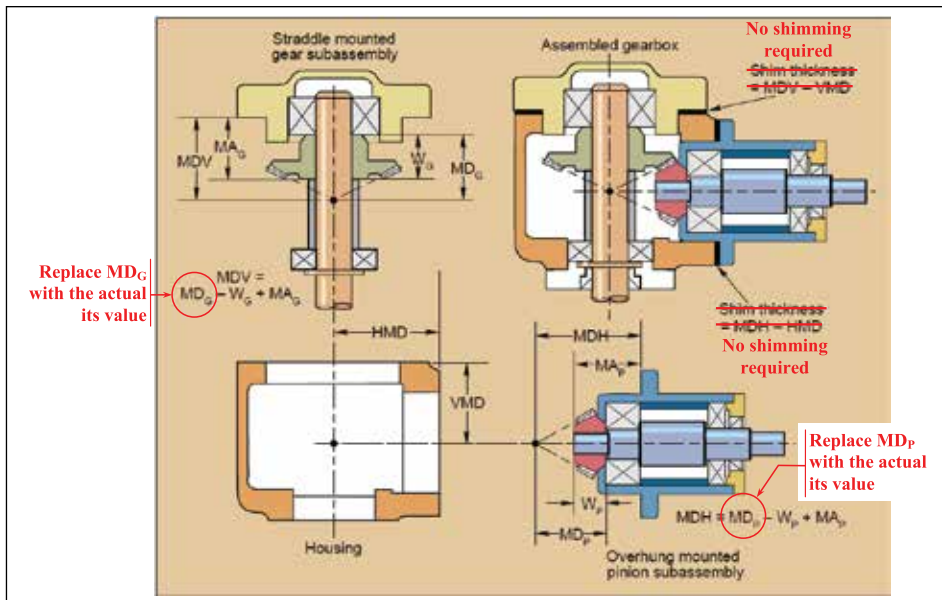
Measurements recommended in [15] for mounting both overhung and straddle-mounted bevel gears in a typical gearbox.
